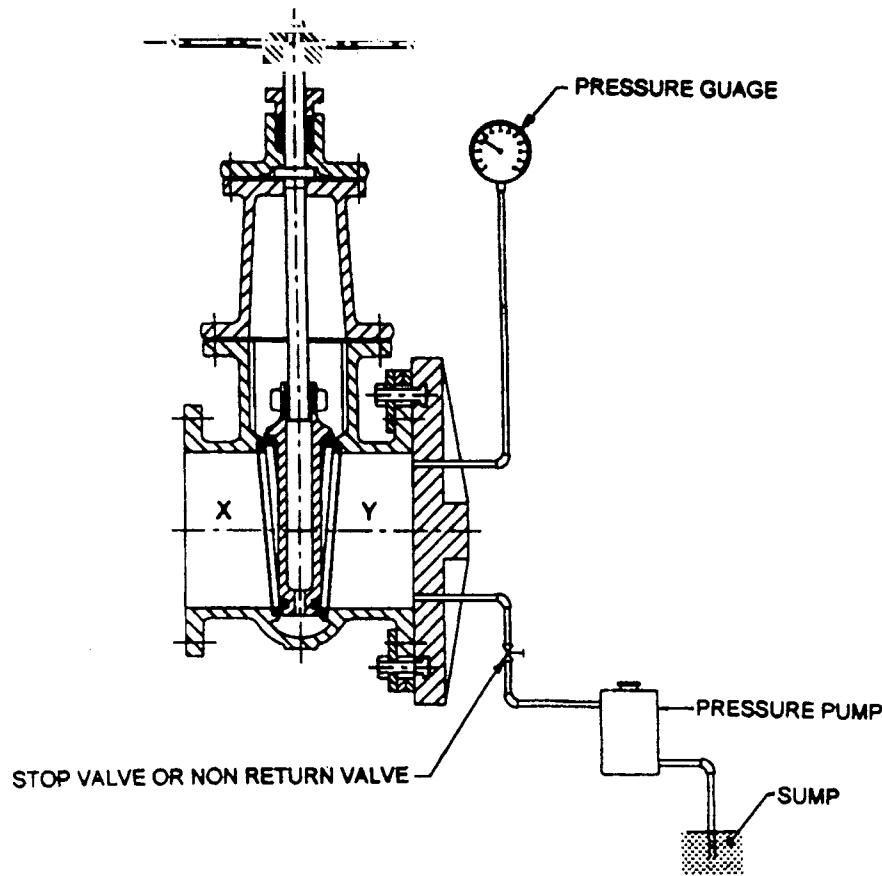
TYPICAL VALVE TESTING ARRANGEMENT FOR OPEN-END TEST
